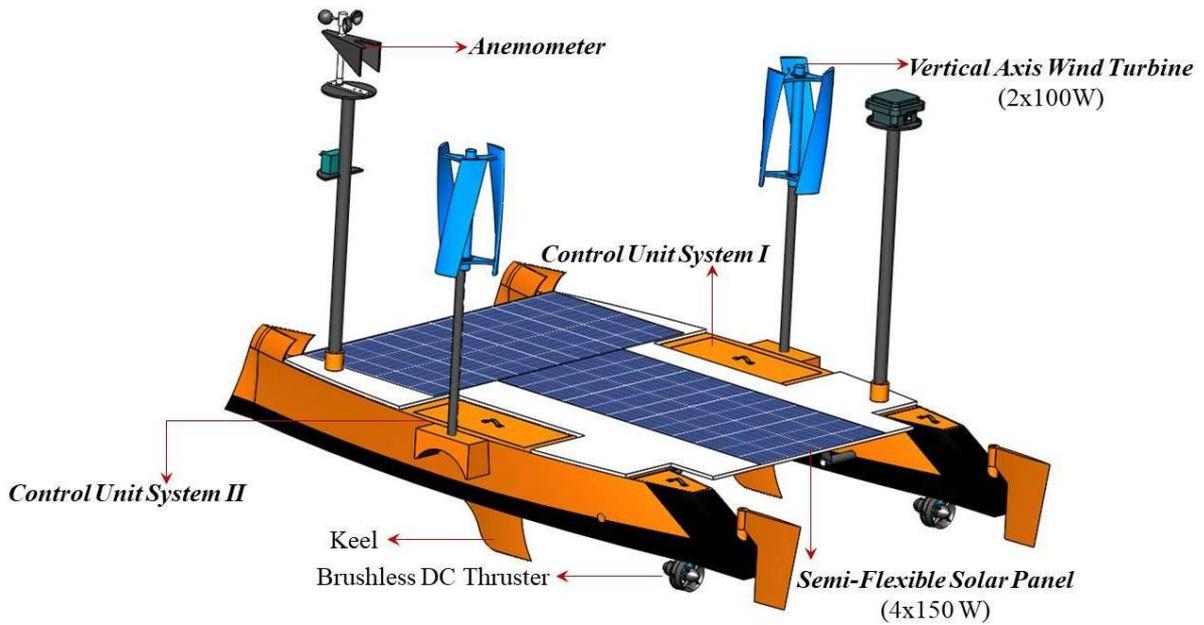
Mechanical 3-d hull structure design module connection in testing platform
